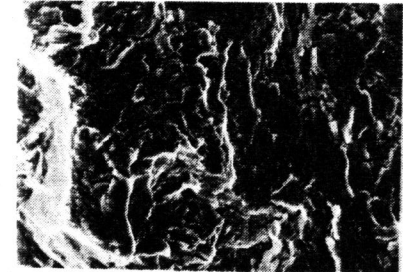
magn. 1000 X. Fatigue fracture of controlled forged rod. Transgranular and intergranular crack propagation.
